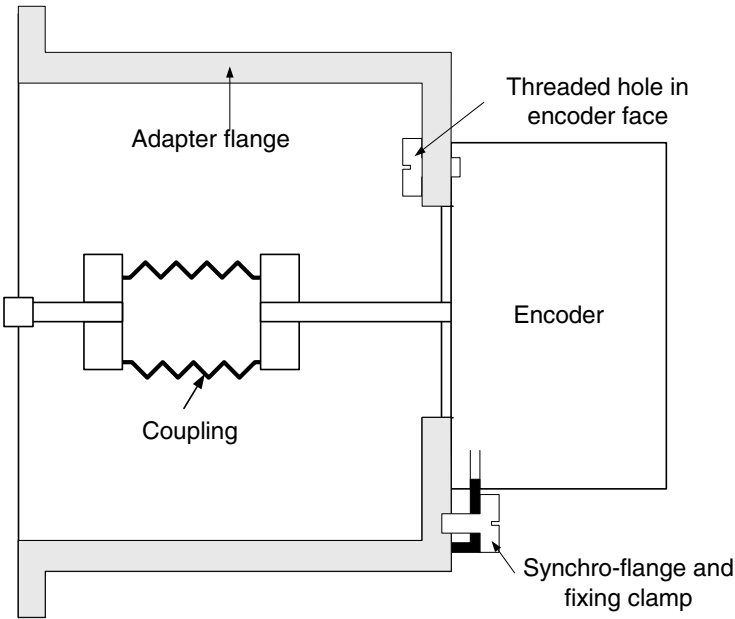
Connecting an encoder to a shaft using a bellow coupling and adapter flange. Threaded holes can be provided on the face of the encoder, or if the encoder is fitted with a synchro-flange, fixing clamps can be used.
